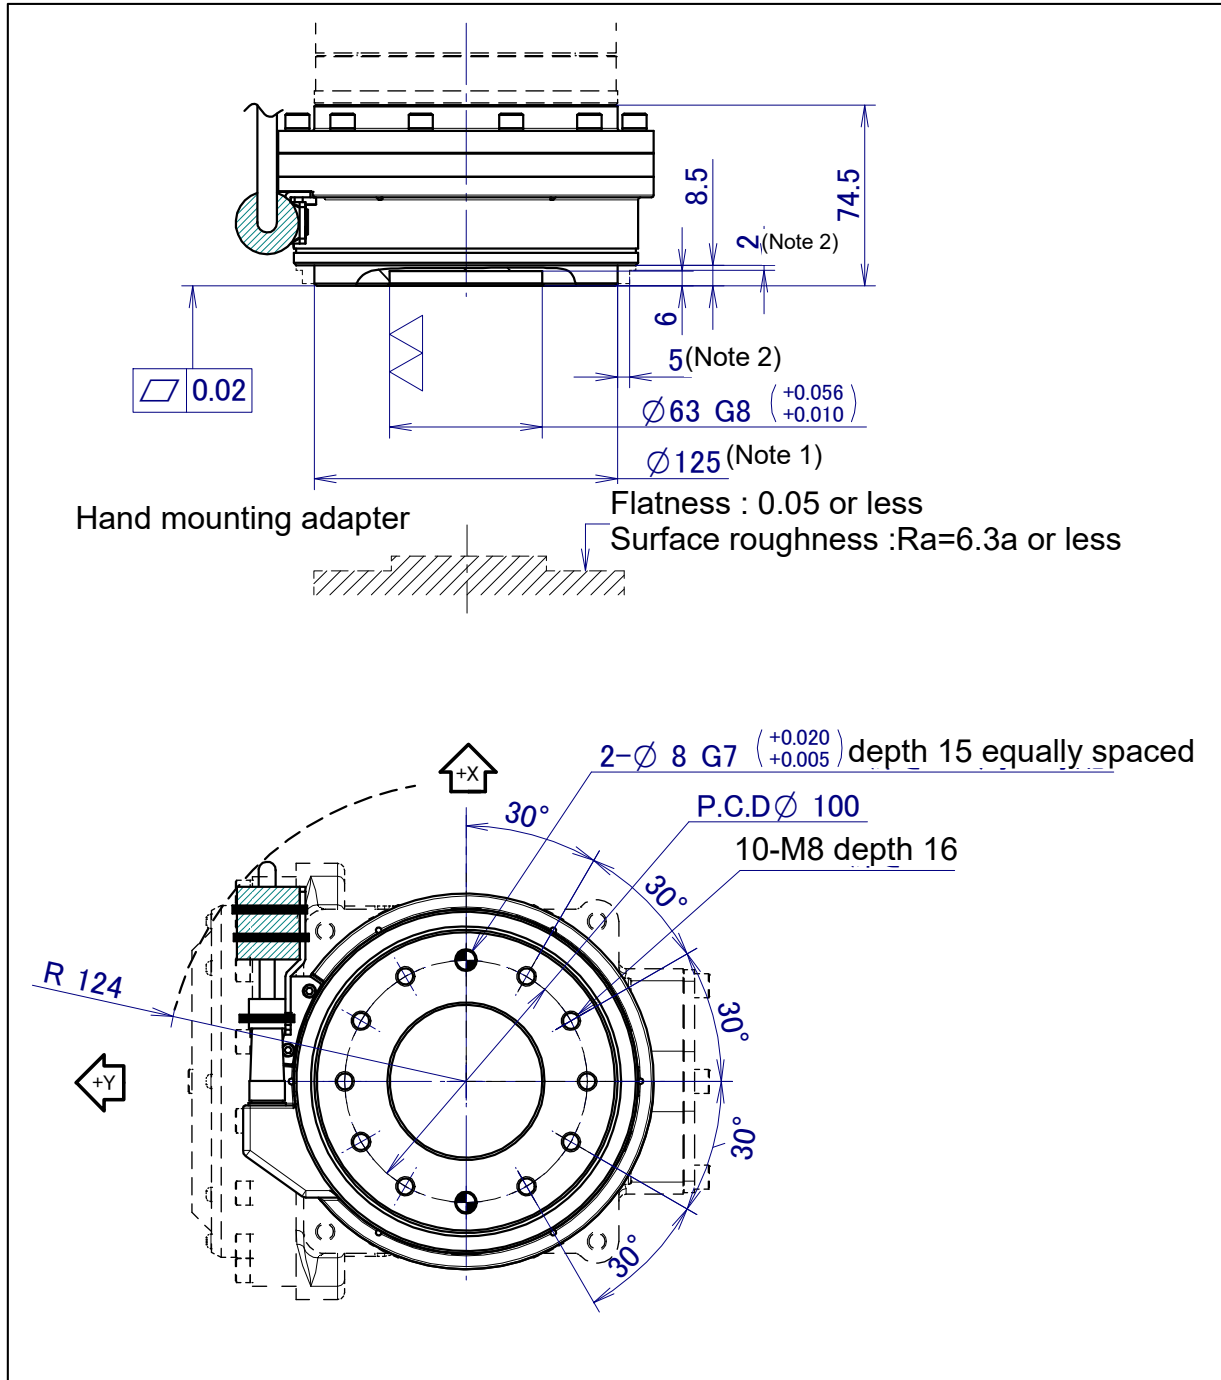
(c) Wrist section end effector mounting surface (FS-100iA)
